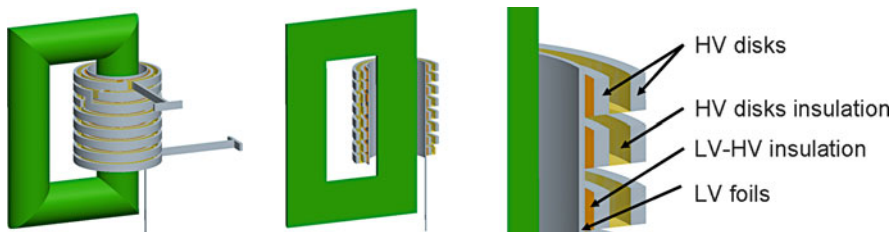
Transformer model showing windings and core (left), its cross-section (center), and the details of the winding disks (right)
